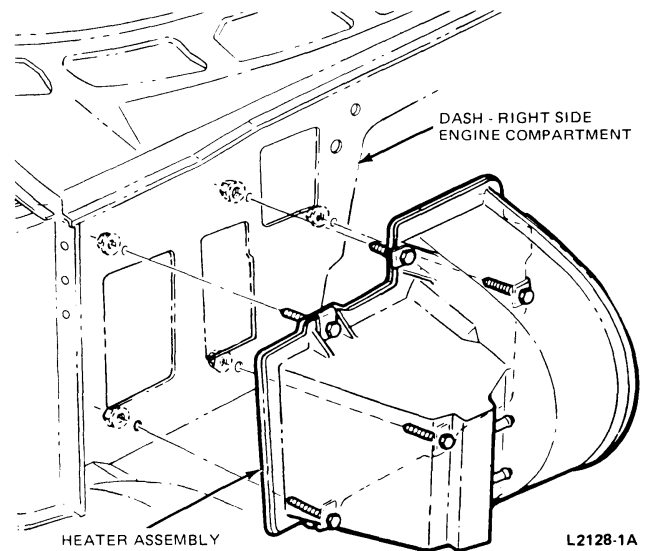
Air Inlet Duct Sub-Assembly Installation
